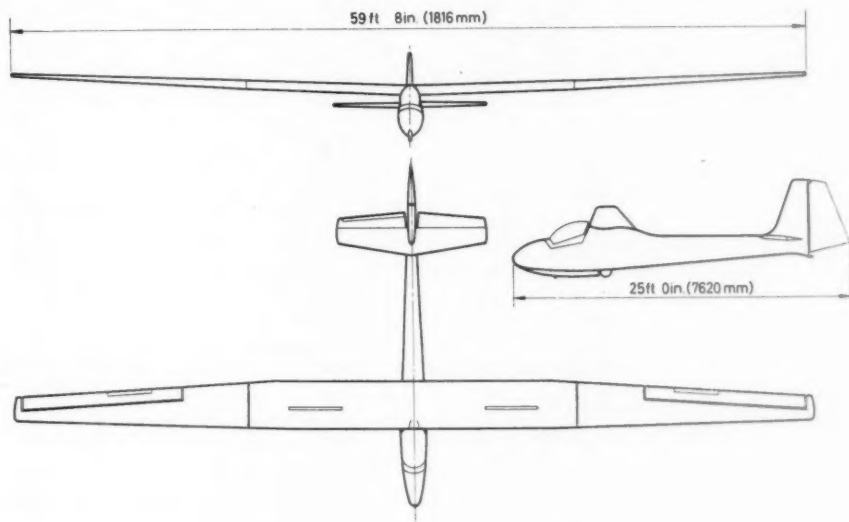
General arrangement drawing of Slingsby Skylark 3F.
